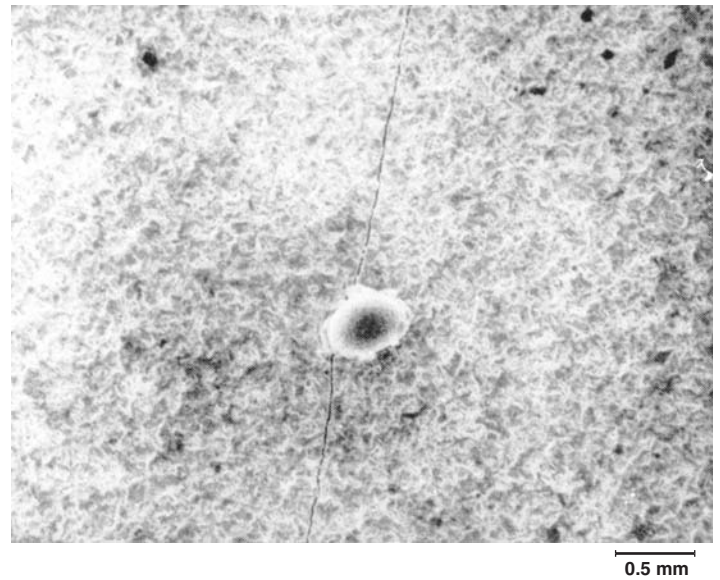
Fractograph showing a metallic bead at the fracture origin. Source: Ref 9
